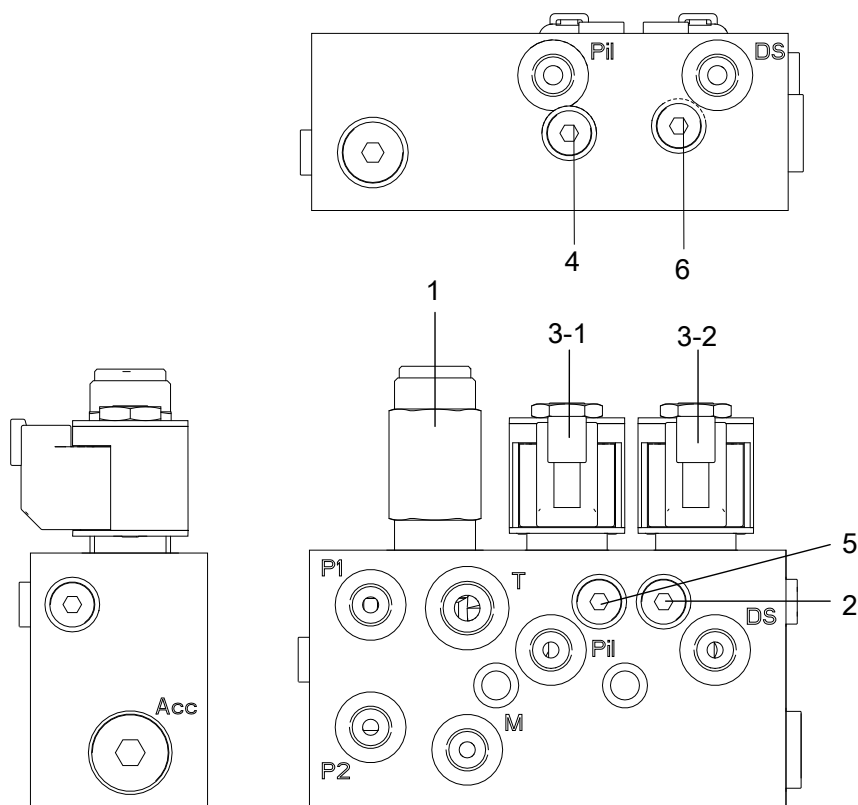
Slewing Cushion Valve (PN.202040003061)
